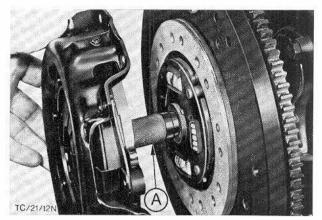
Centre clutch disc and pressure plate. A-Tool No. G2-7600B/P-7137.
